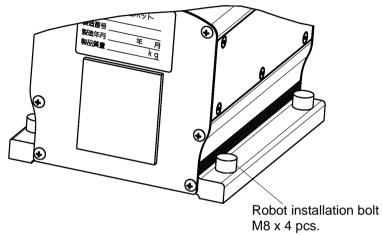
Robot installation bolts (KHL-300, KHL-400)
